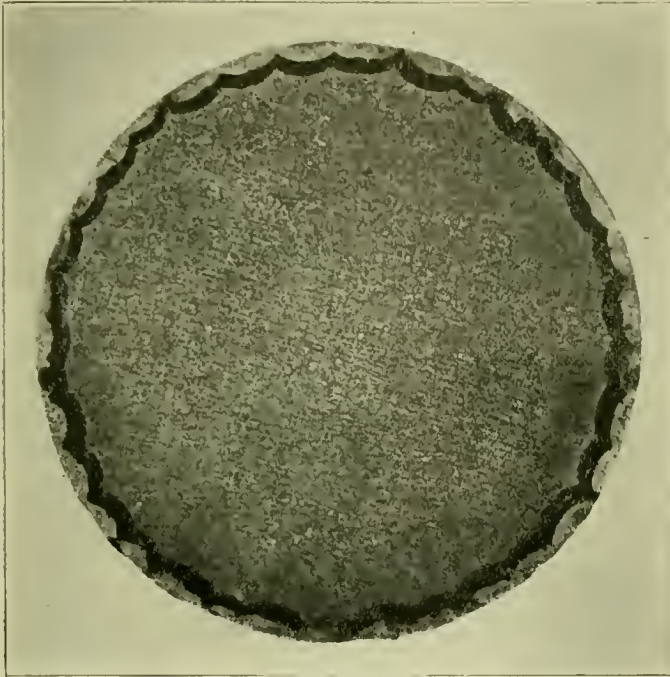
Etched Cross Section of a Failed Piston Rod; the Crosshead Fit Had Been Built Up by Electric Welding
